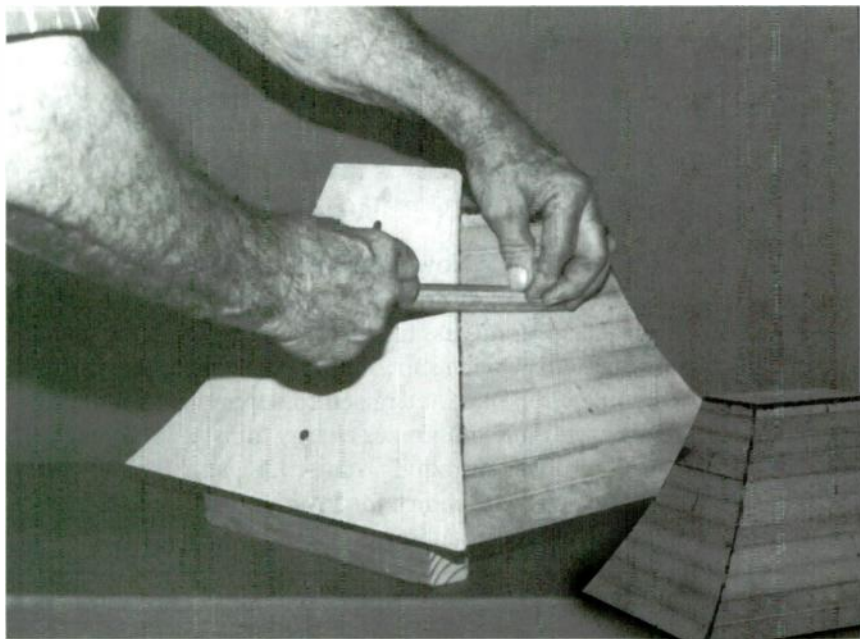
Using a fine-tooth rasp to trim the ends of a side panel mounted on the core assembly.
